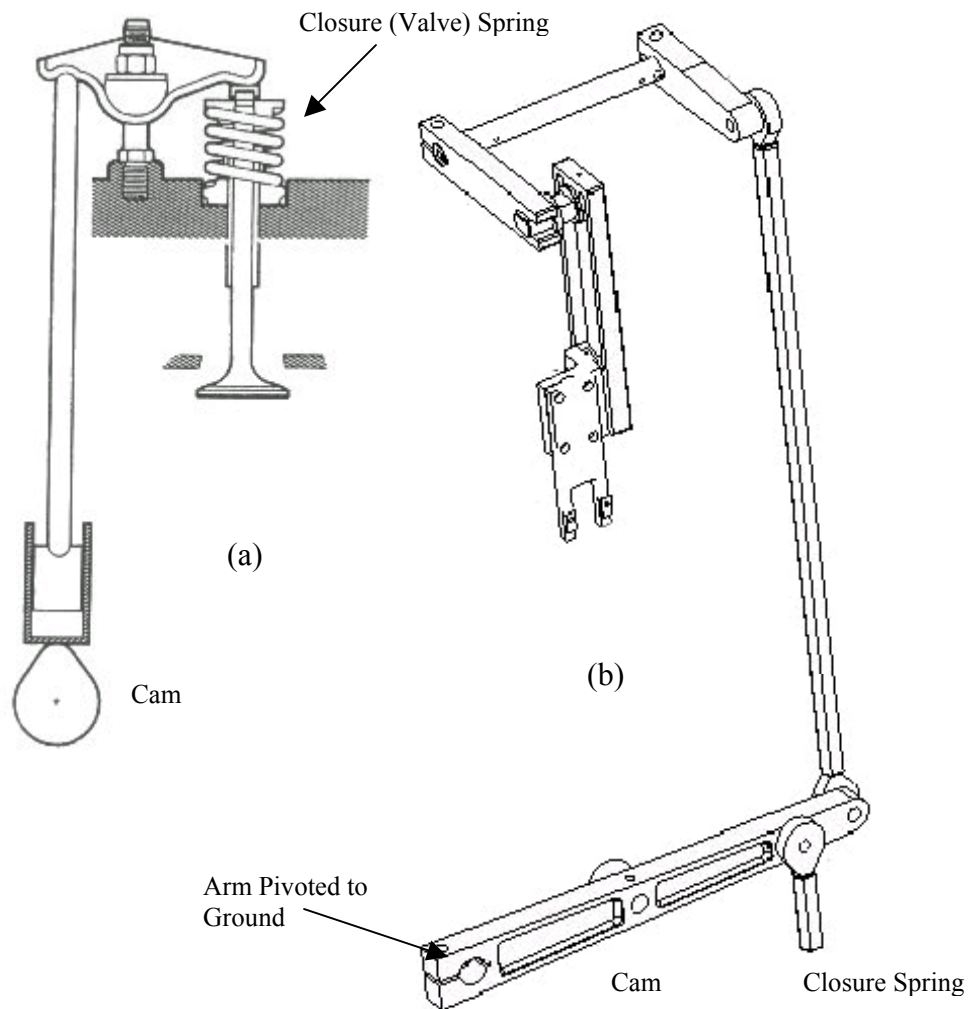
Schematic of Overhead Valve Train (a) and Typical Industrial Assembly Machine Cam-Follower Station (b)
